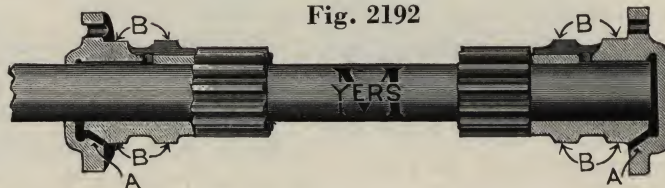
shows a sectional view of the Bearings and illustrates the Oil Passage, "A" through which the oil passes around the ends of the Shaft, washing out any sediment that will naturally accumulate at the dead end of the Shaft (Self Cleaning). This insures Thorough and Complete Lubrication at this point—
